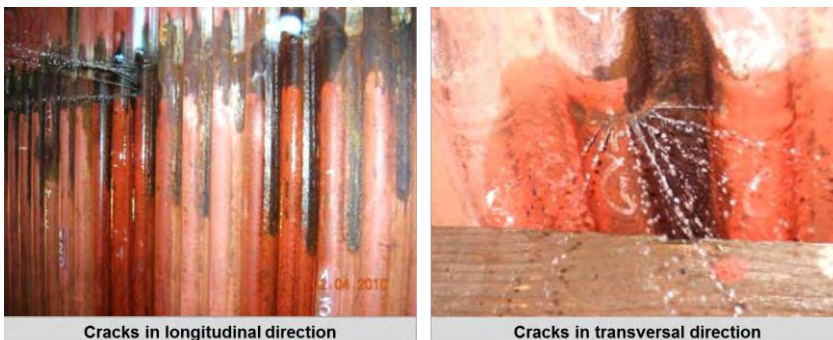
Stress corrosion damages on T24 membrane wall tube-to-tube butt welds during commissioning
